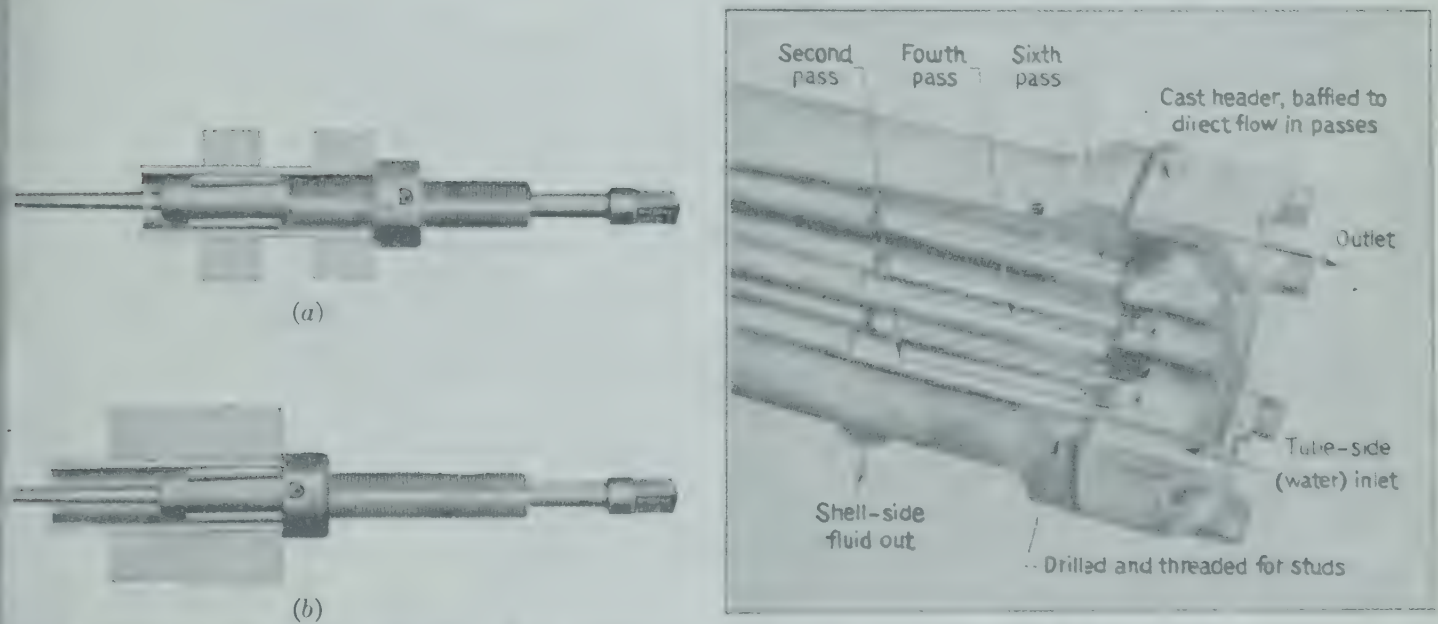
(a) Tube rolled into inner tube sheet by an adjustable expander; (b) same tool used for a single thick tube sheet. (Gustave Wiedecke Co.)
